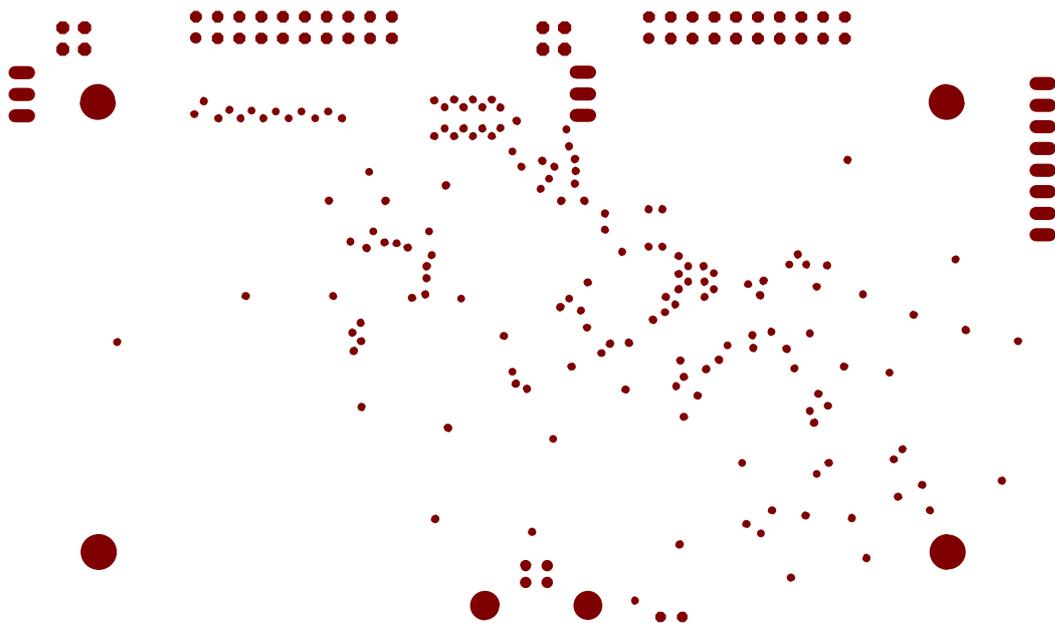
The exposed parts of the bottom layer of the PCB, visualized using the Gerber files.
